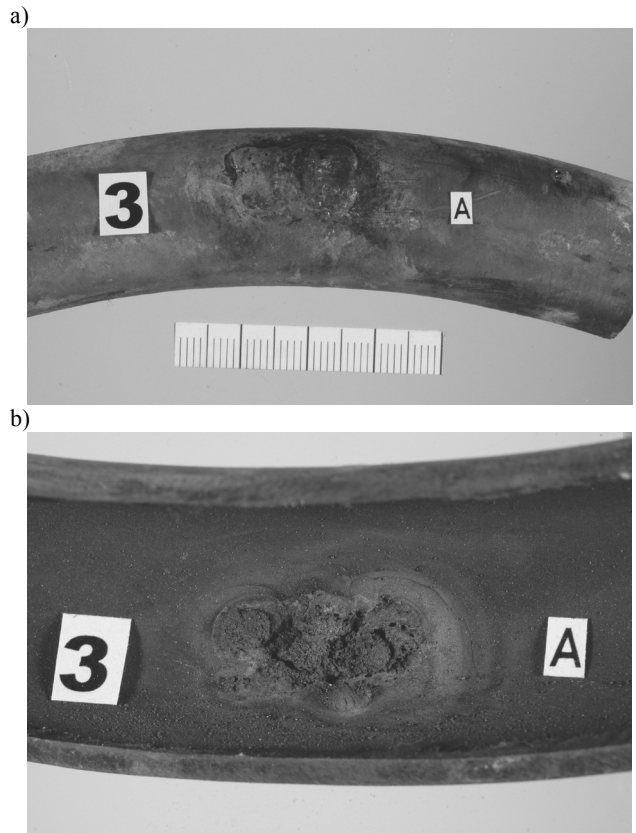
a) The padding weld on the outer tube surface; b) the view from the inside - the progress of corrosion processes
